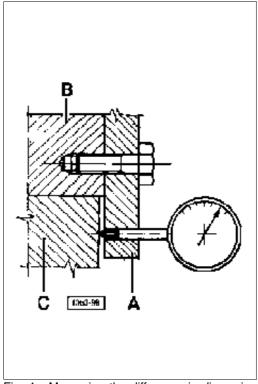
Measuring the difference in dimension between oil pan and engine block planes.
